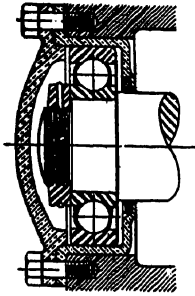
Cartridge-type Mounted Ball Bearing.
